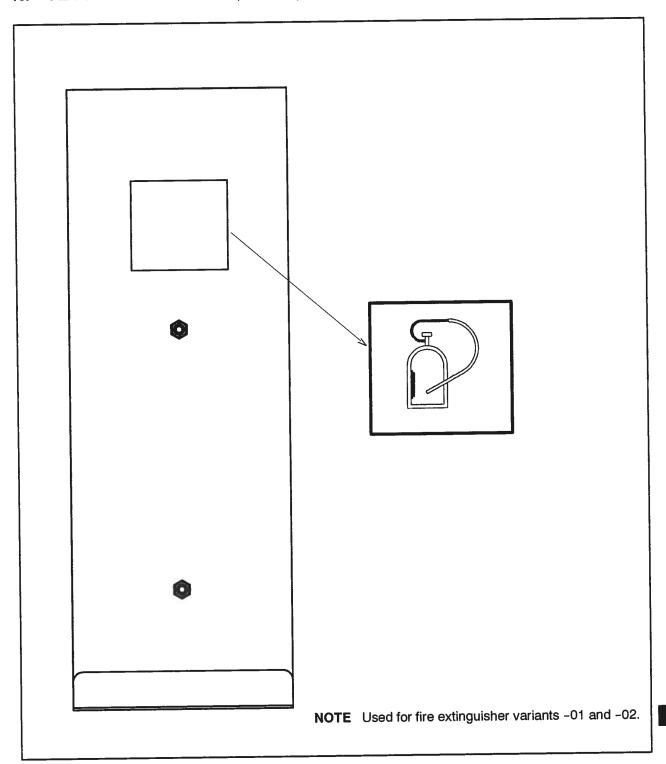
Placard location on back of fire extingusisher holder assembly (Original Version)
